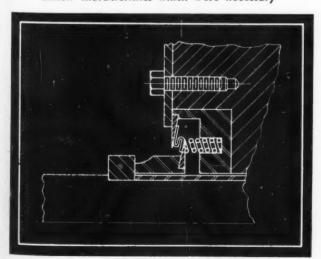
Above—Double-type rotating shaft seal arrangement had same drawbacks as single seal
